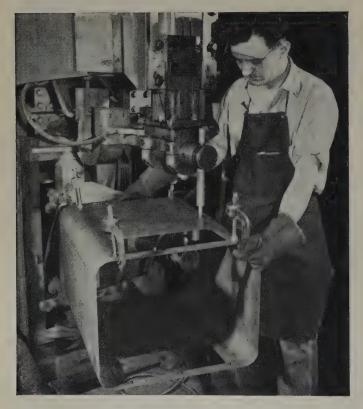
Spot welding sheet metal case made up of four parts: two side panels, a front panel, and a rear panel
